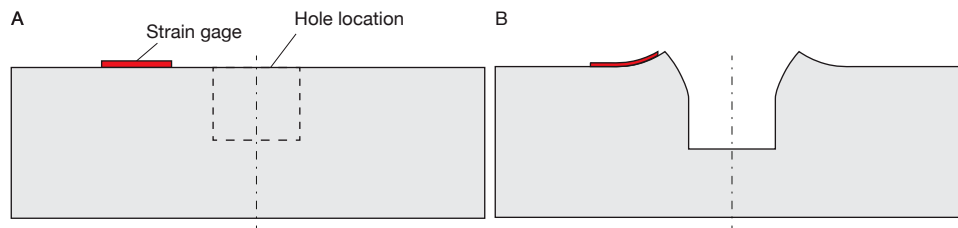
Strain gauge method for residual stress measurement. A) Before hole drilling; B) after hole drilling.
